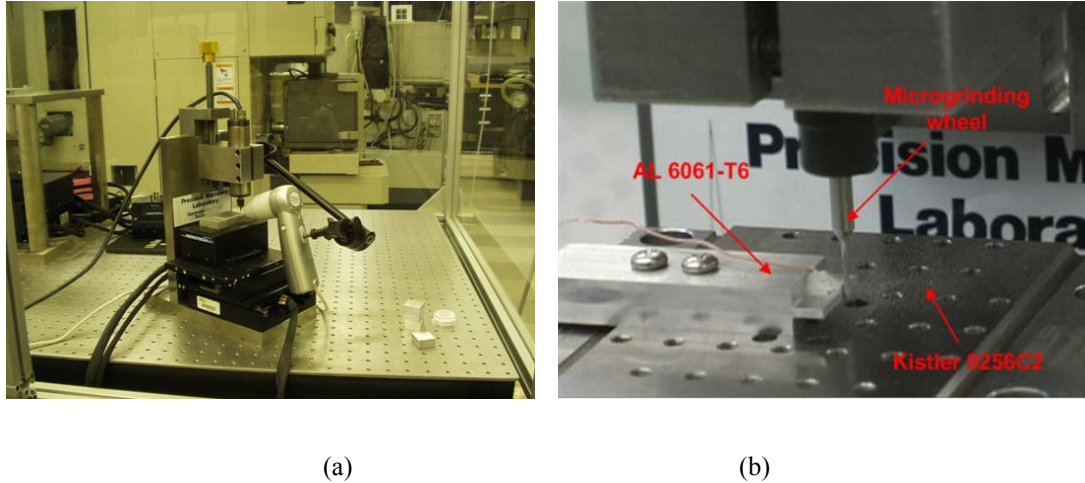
Schematic of (a) a miniaturized machine tool and (b) Illustration of experiment configuration
